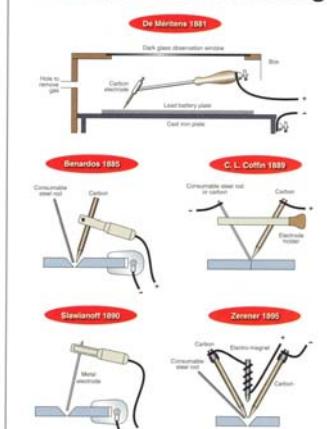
Summary of unshielded arc welding processes
